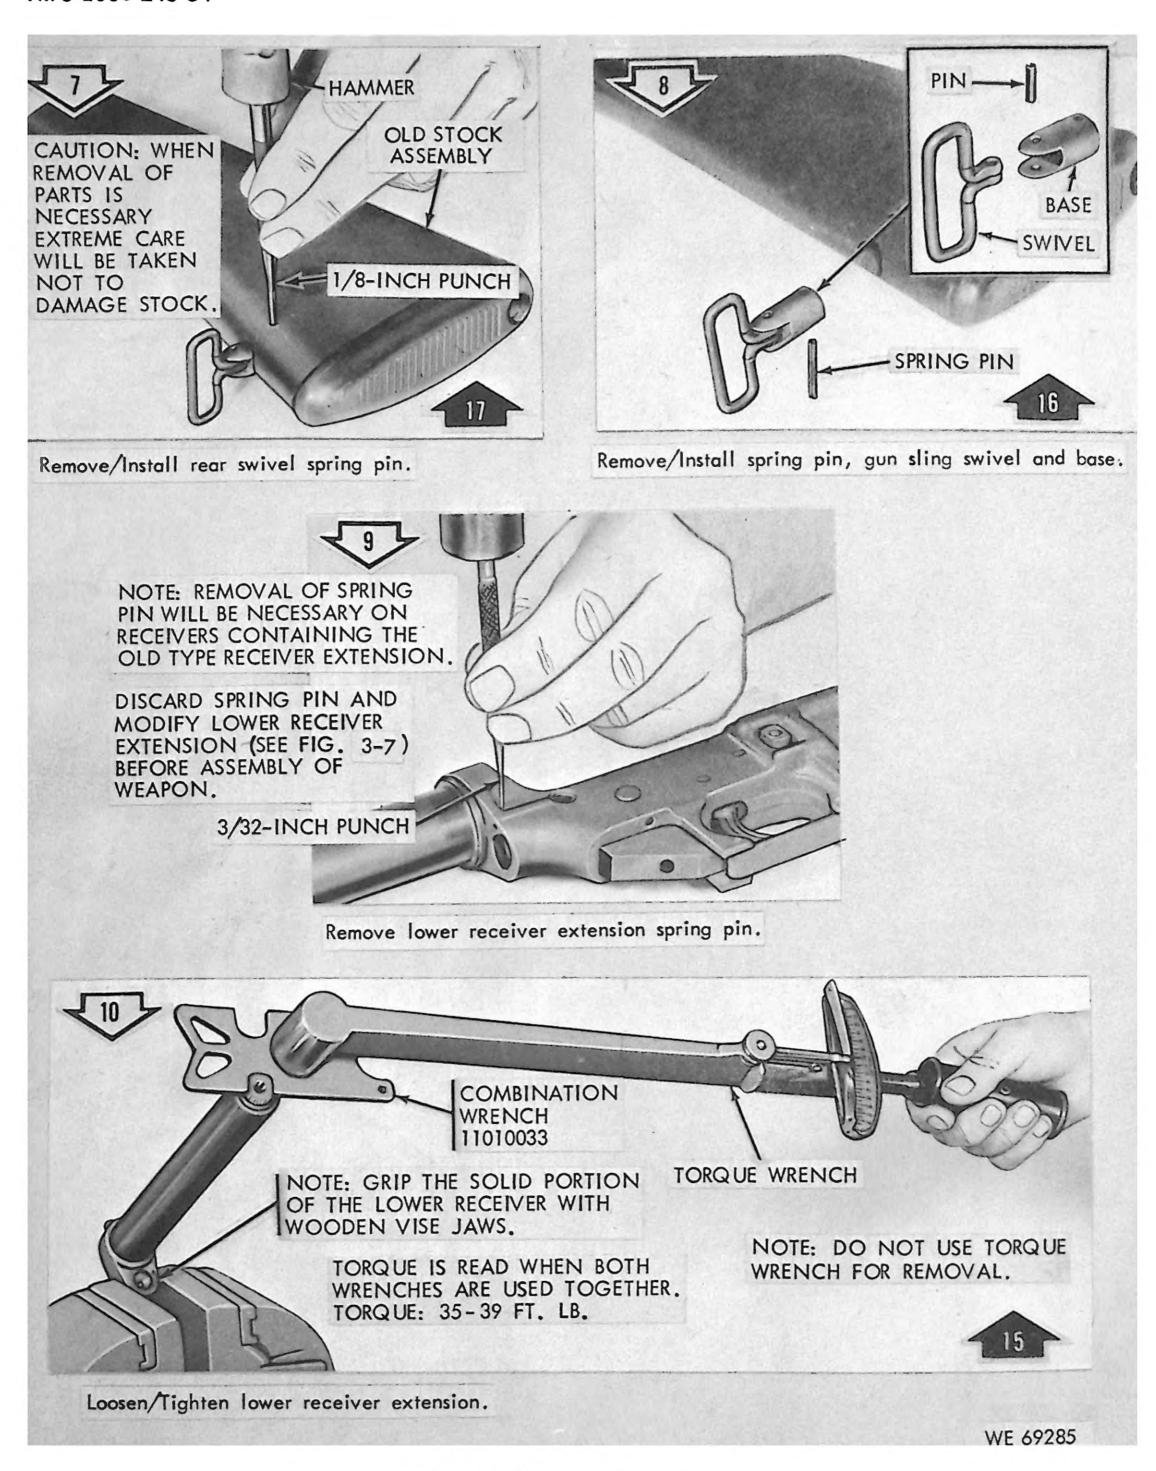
Disassembly/assembly of lower receiver group. (2 of 5)
